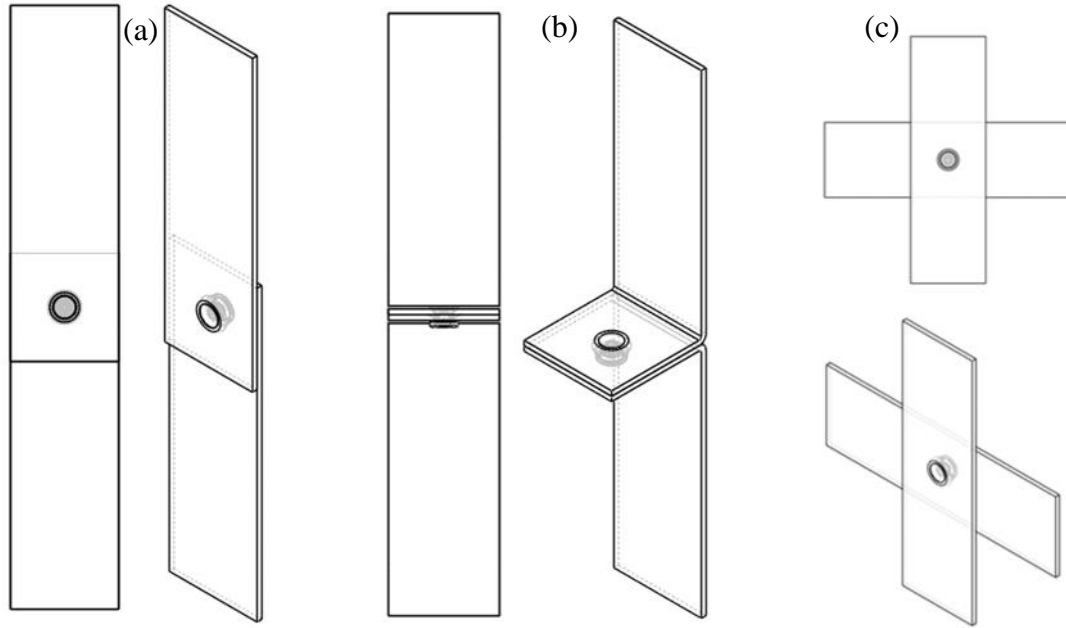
Front and isometric views of common sheet metal joint specimen configurations (a) tensile-shear (b) coach-peel and (c) cross-tension
